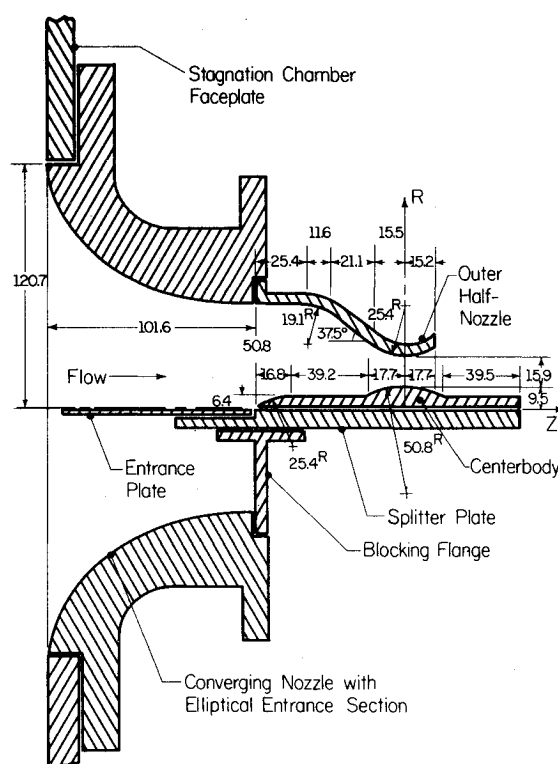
Half-section drawing of annular axisymmetric experimental configuration; all dimensions are in millimeters.
